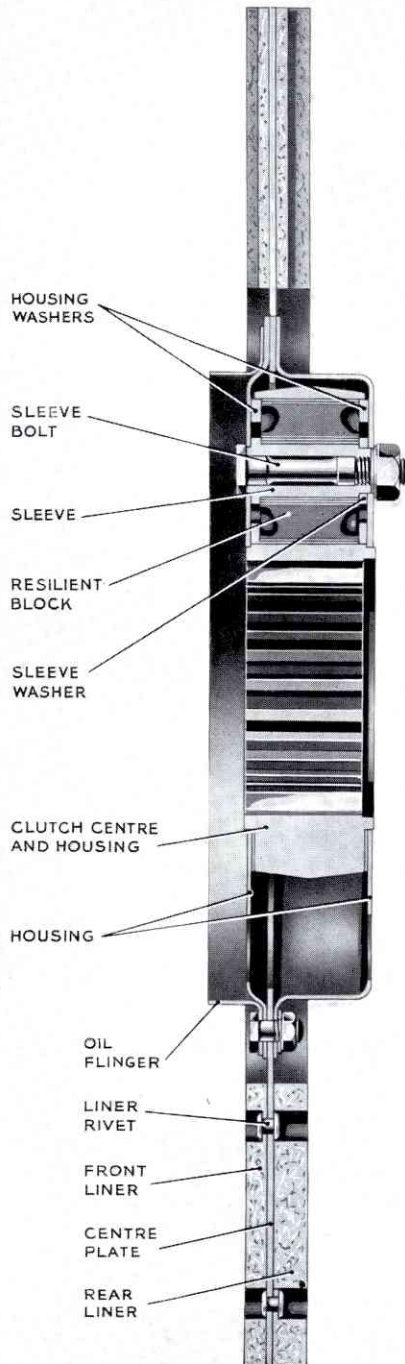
LAYRUB FLEXIBLE CLUTCH CENTRE
